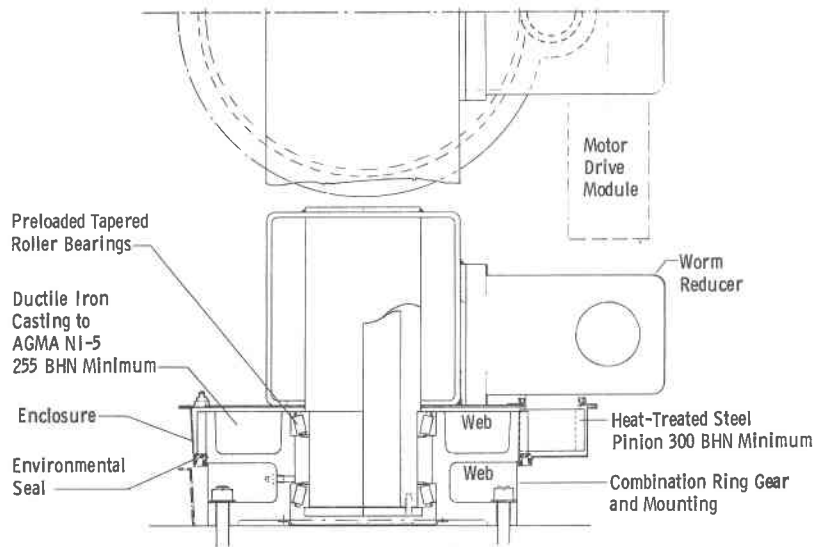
Direct Gear Drive Using Preloaded Tapered Roller Bearings
